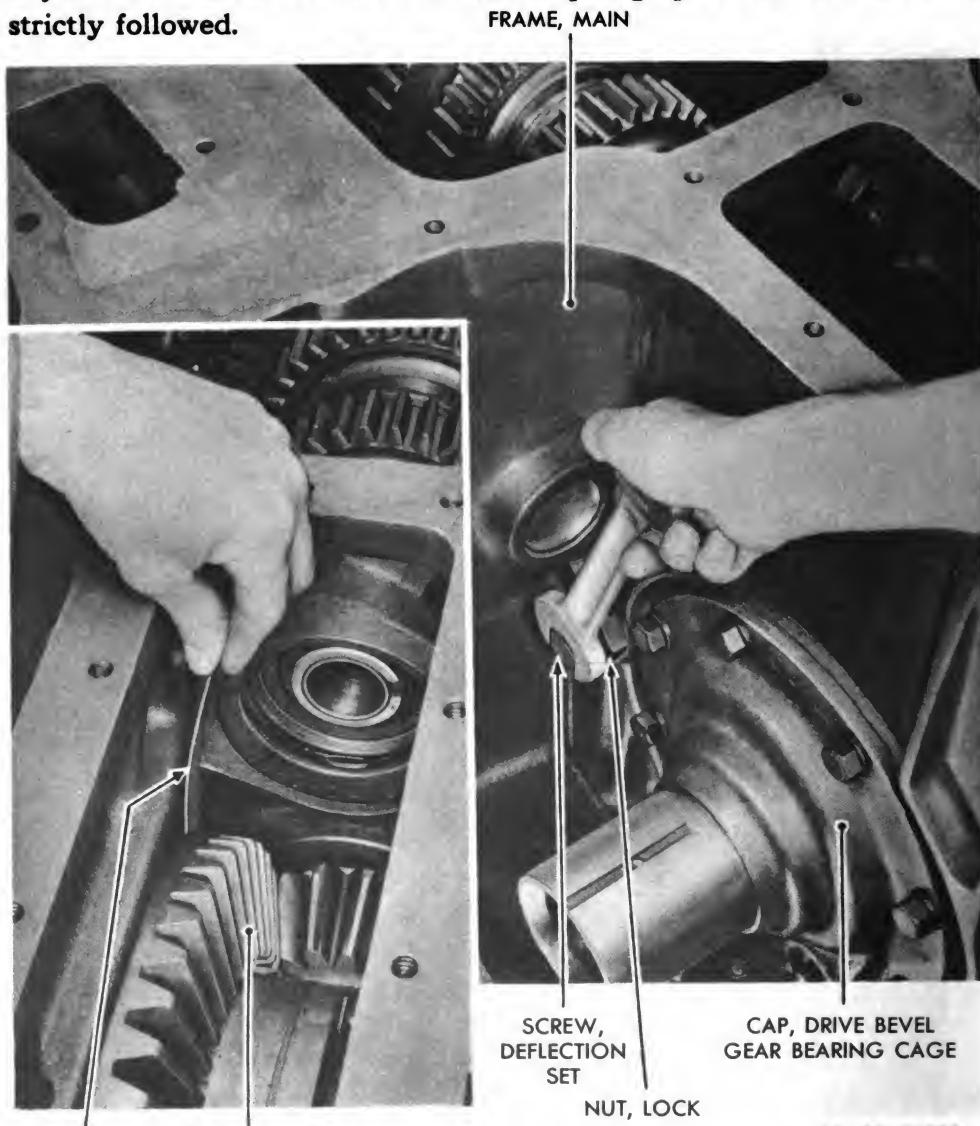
Drive Bevel Gear Deflection Screw Adjustment
